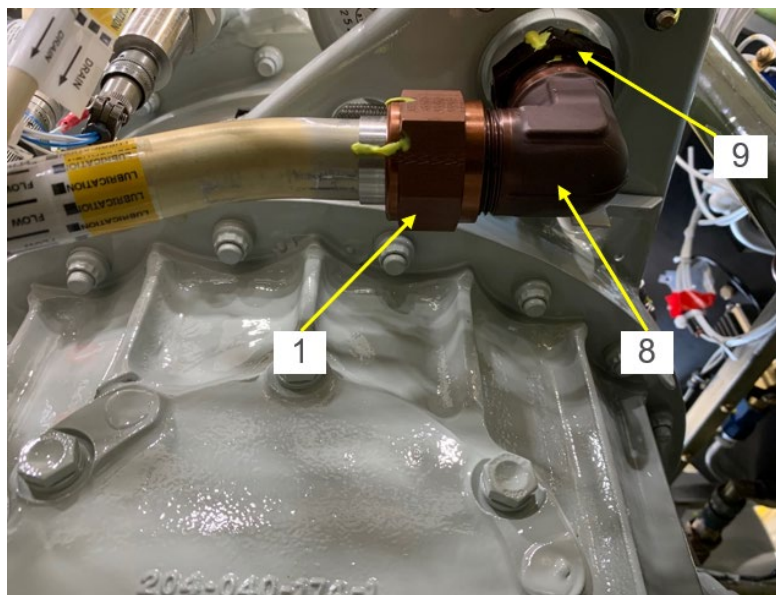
, Detail B. Adapter FC-3662 and Tool 204-040-354-009.
